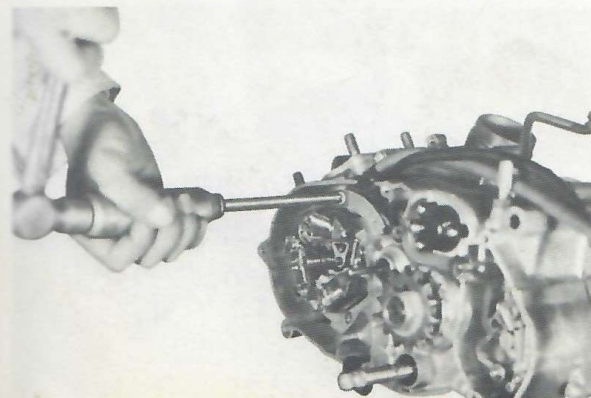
Unscrewing stator and neutral switch wire fitting screws with cross head screw driver
